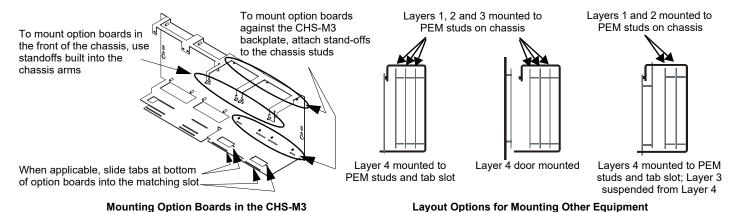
Chassis CHS-M3 Equipment Mounting Options
